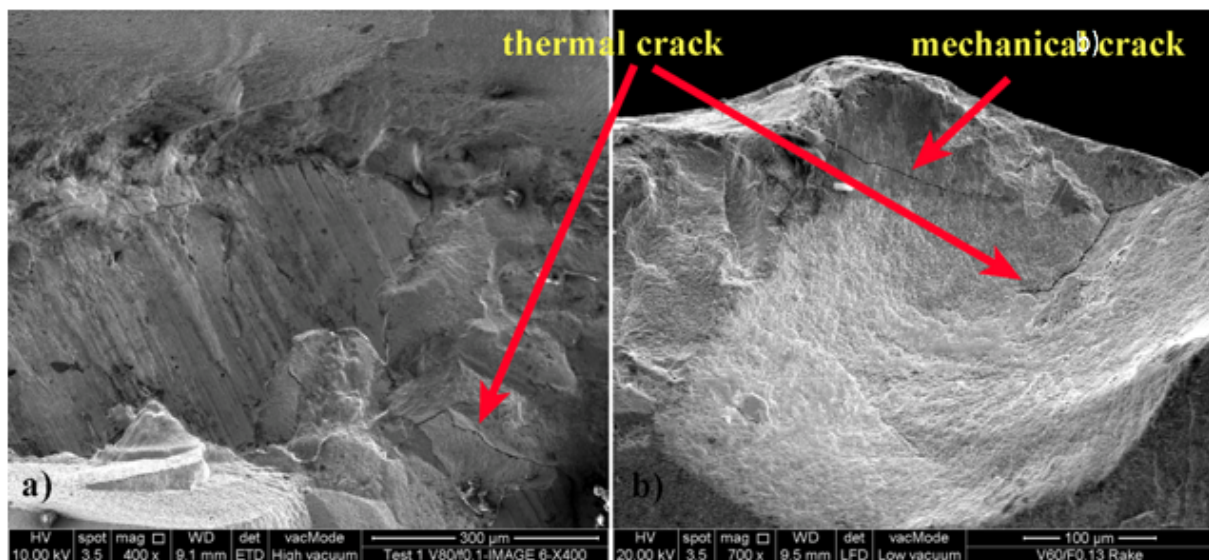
Thermal crack (perpendicular to cutting edge) and mechanical cracks (parallel to cutting edge) at (a) V80 (b) F0.13 mm/tooth
